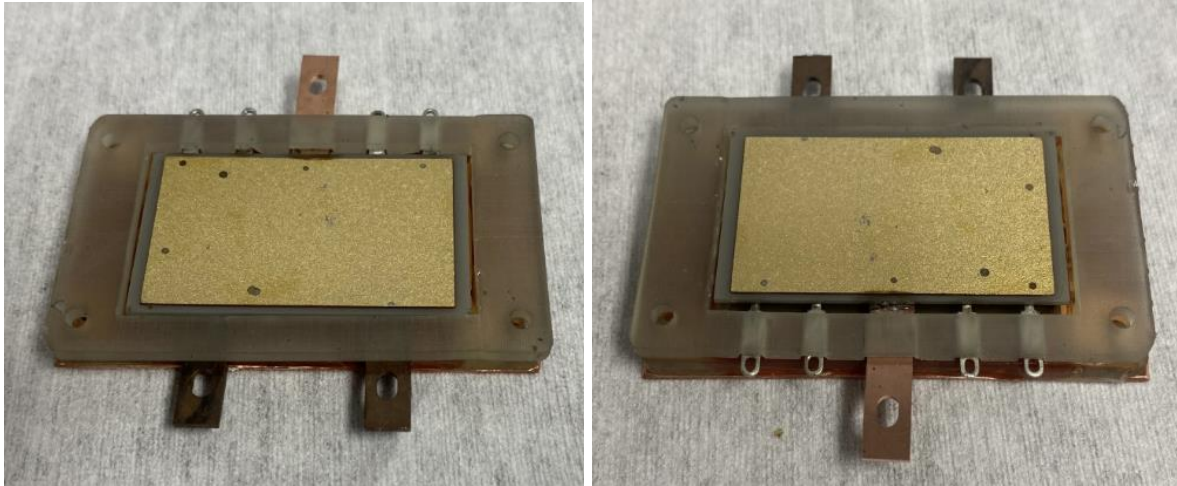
28 Fabricated 3.3-kV double-sided wire-bondless power module.
